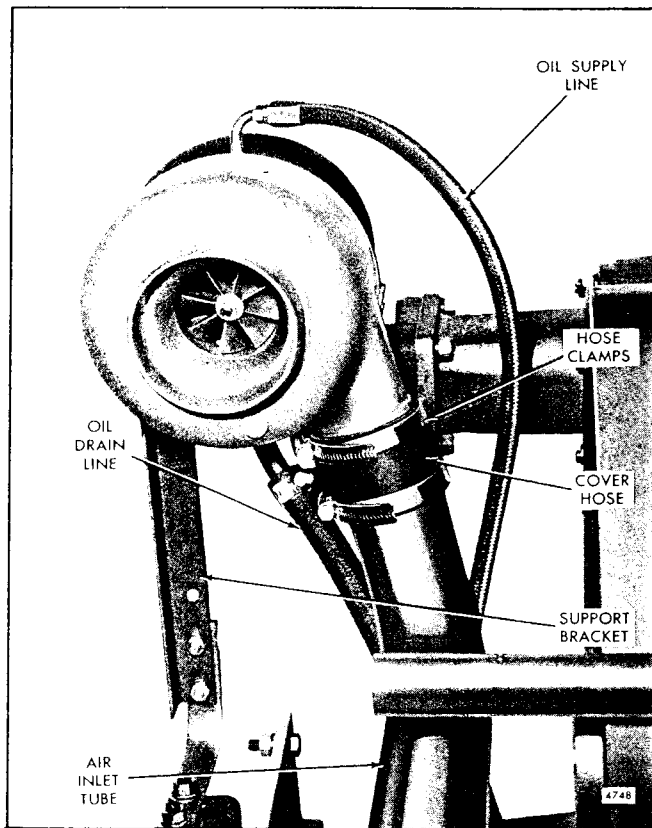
Turbocharger Support Bracket, Oil Lines and Air Inlet Tube
